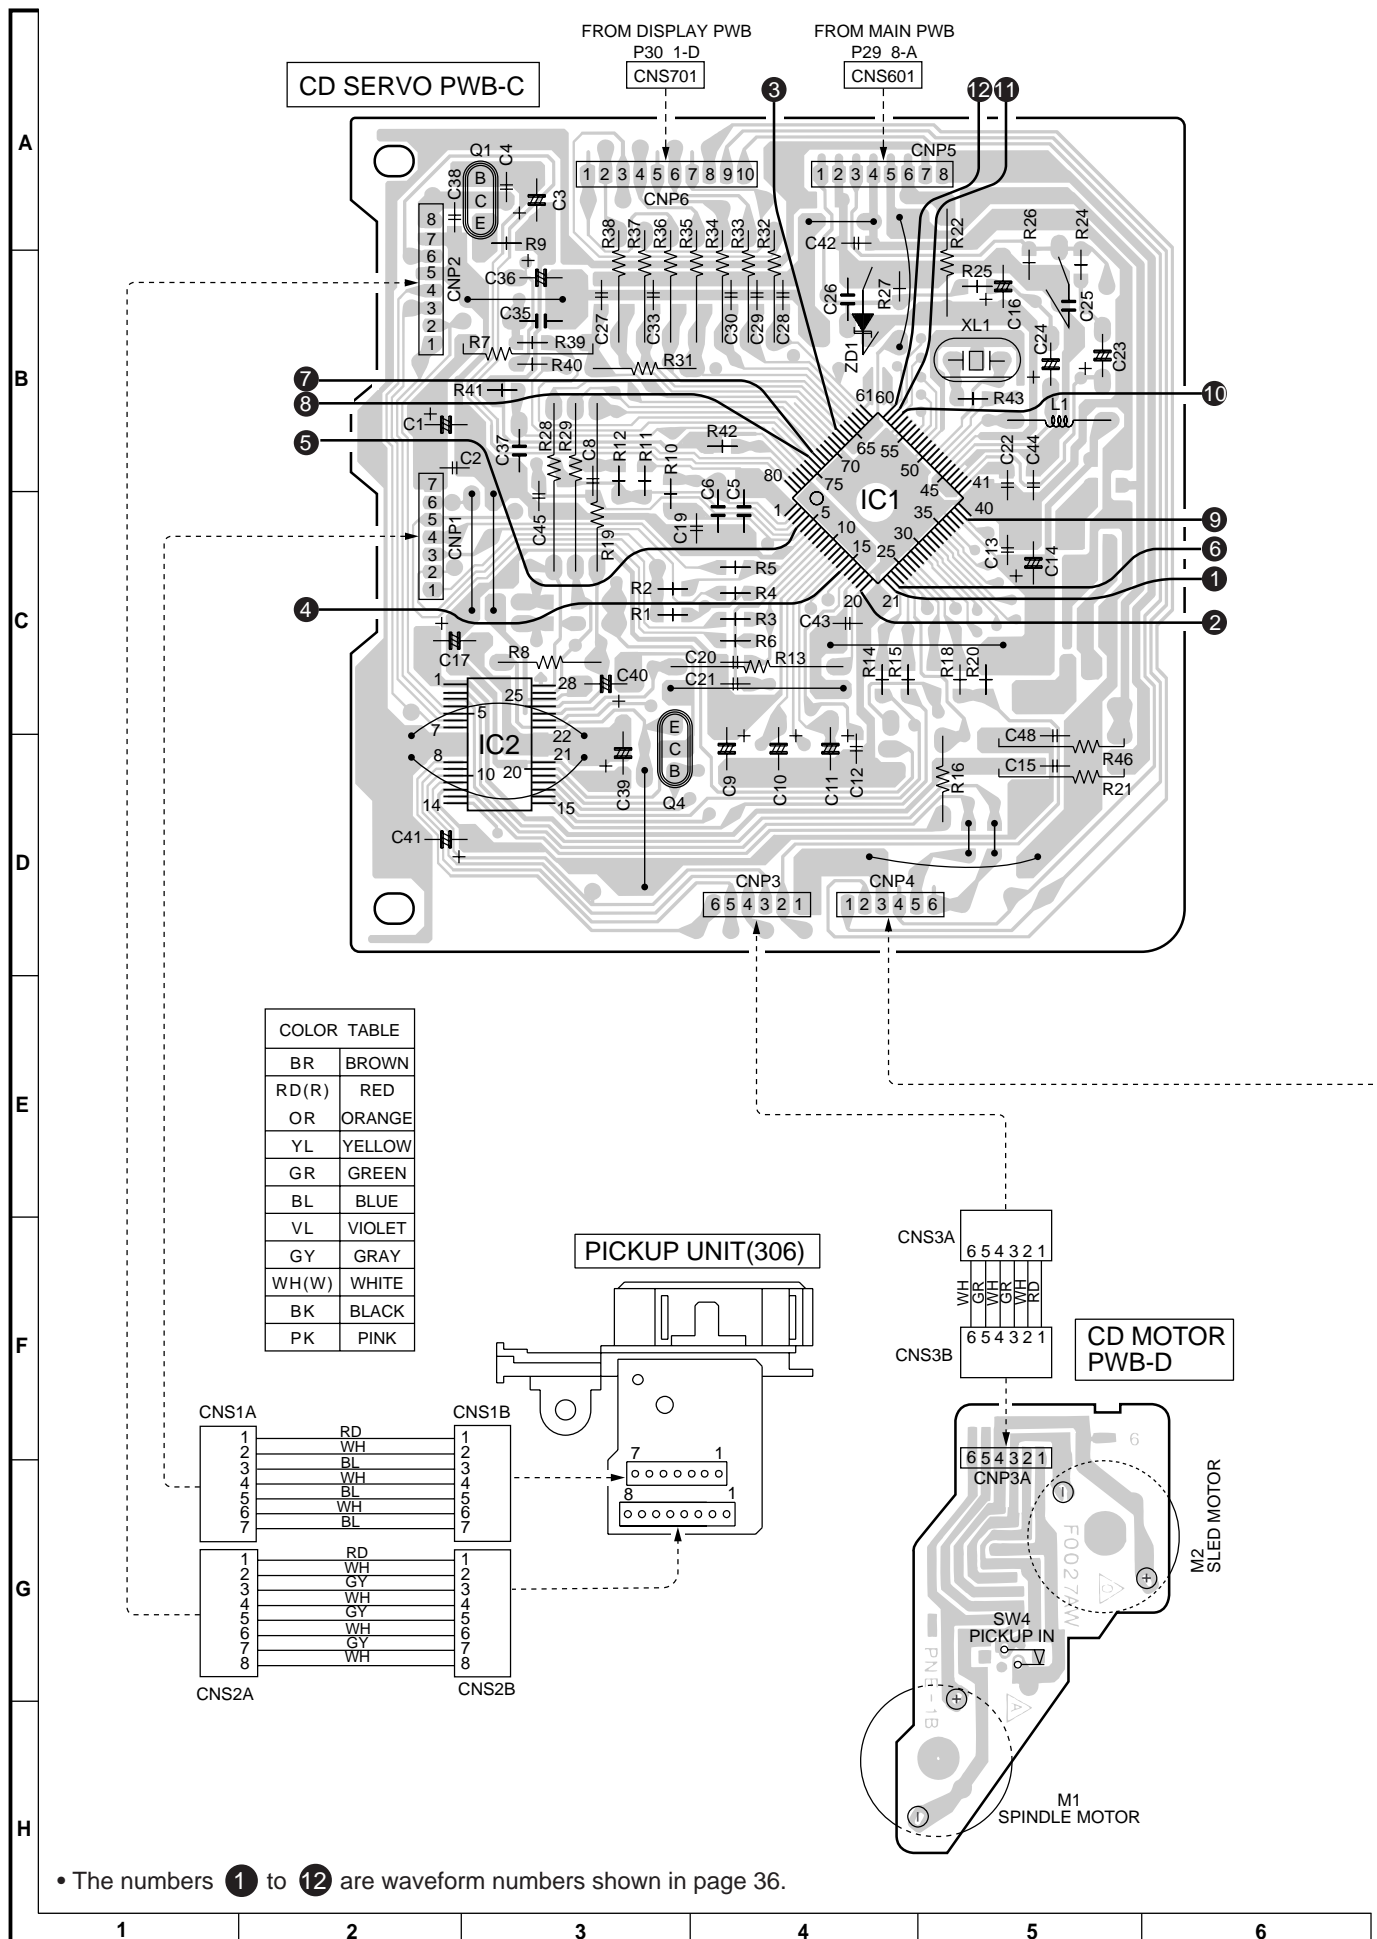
WIRING SIDE OF P.W.BOARD (5/7)
